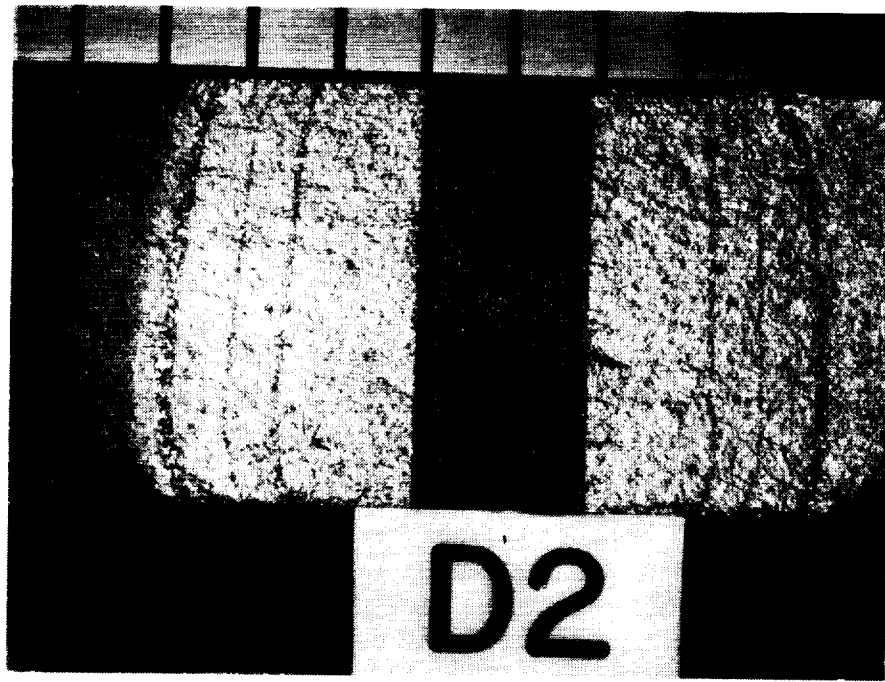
Fracture surface of a range marked through-crack specimen.
